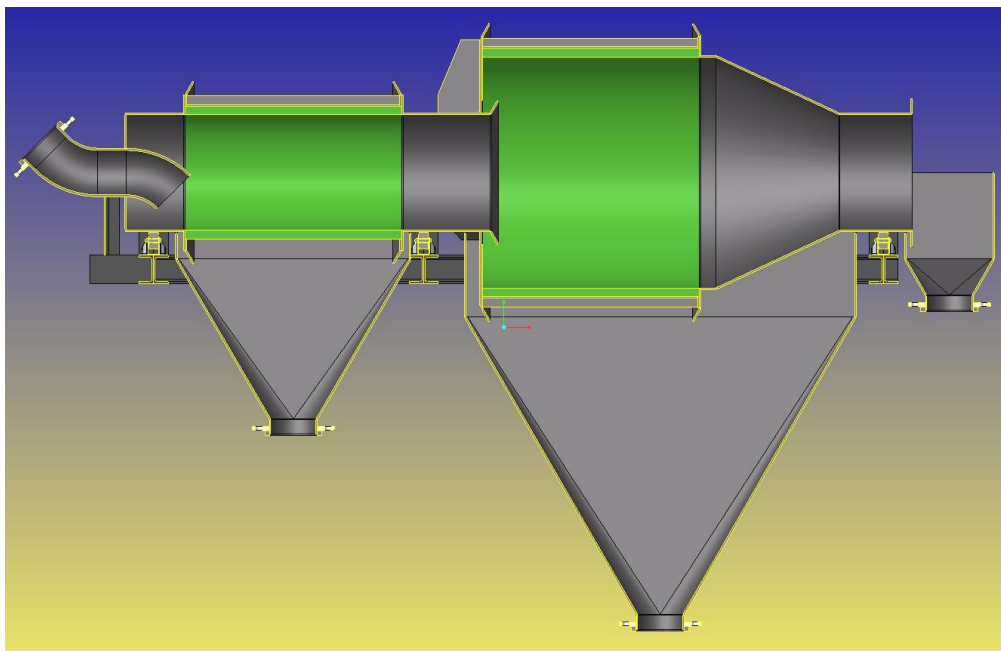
Conceptual drawing of Test Trommel Mk2: Drain section and Submerged washing section.
